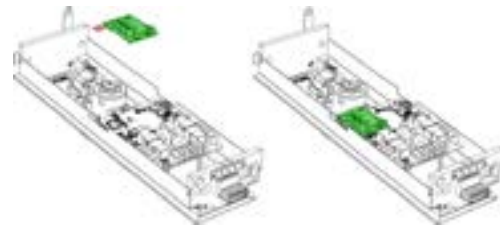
Installing Enelion Bridge in the ENELION VERTICA Module.
